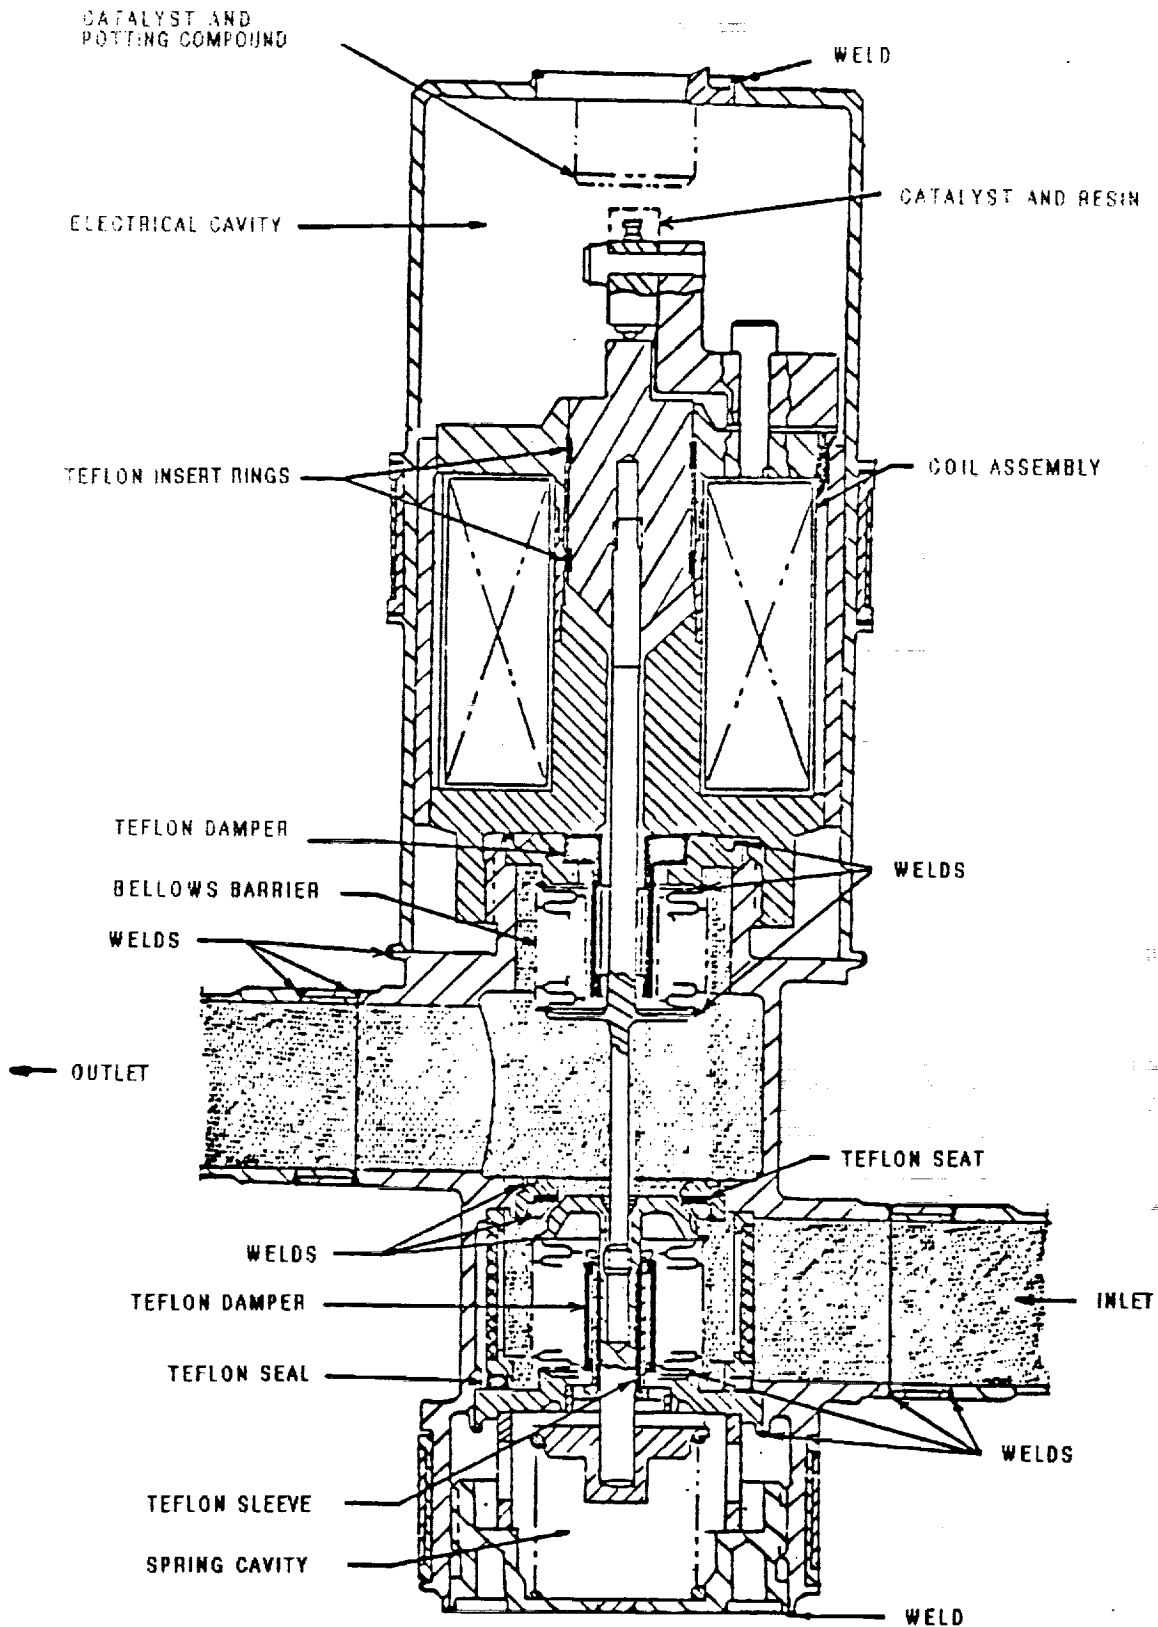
HELIUM PRESSURE REGULATOR ASSEMBLY
